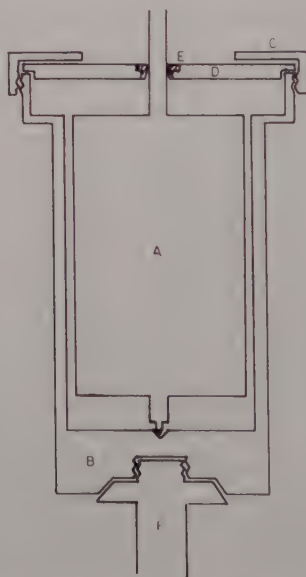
Detail sketch of cup and bob and drive assembly. (A) Bob; (B) cup; (C) screw cap; (D) lid; (E) Oilite bushing; (F) drive shaft.
